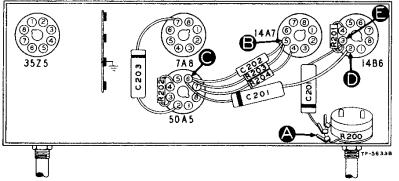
BOTTOM VIEW, SHOWING SECTION 1 TEST POINTS
